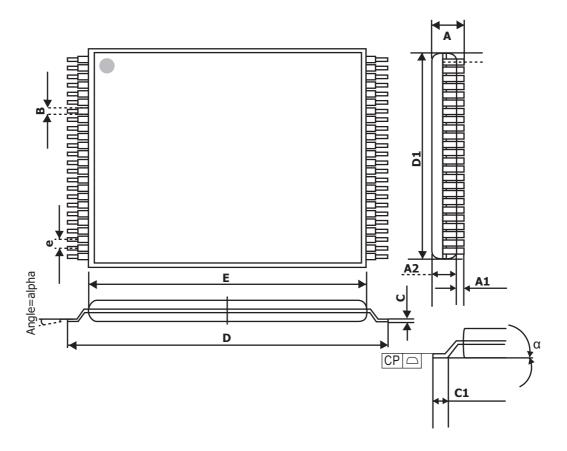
48-pin USOP1, 12 x 17mm, Package Outline
